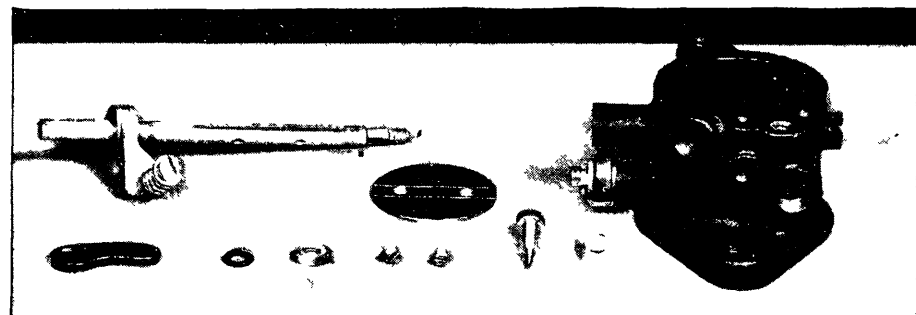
Remove float needle valve (scrap). With a scribe make lines on the valve along both edges of the shaft so that the valve can be reassembled in the same position. Then remove throttle stem nut, pump lever, throttle valve and stem
